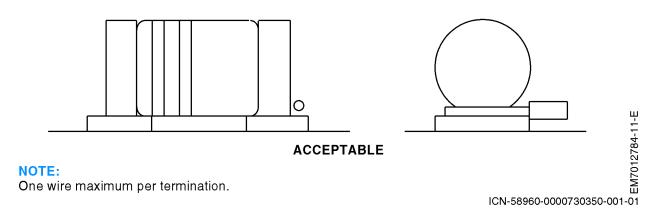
Additional Wire on SMT Cylindrical End Cap
